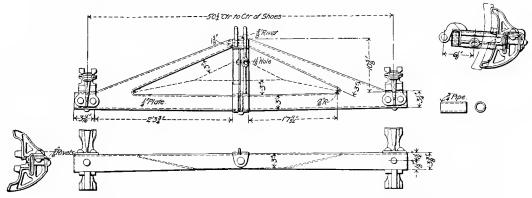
Pressed Steel Brake Beam. Pressed Steel Car Company.
